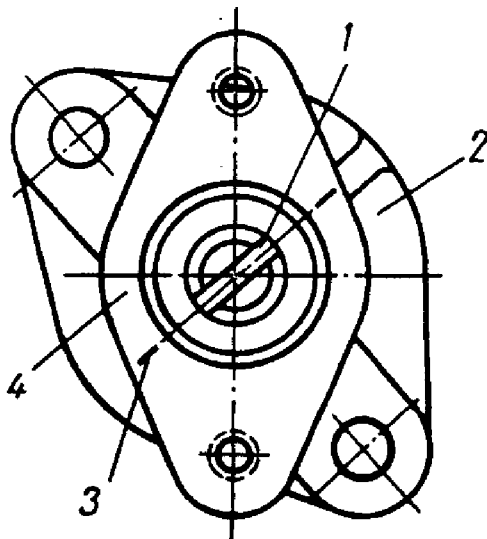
IGNITION DISTRIBUTOR DRIVE SETTING
